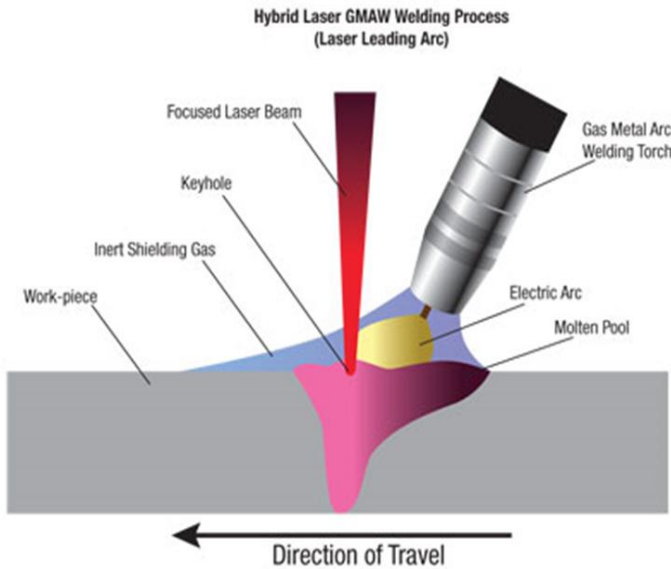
Hybrid Laser GMAW Welding Process.
